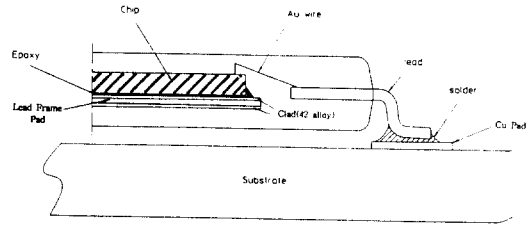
Cross sectional view of TSOP using clad lead frame.
